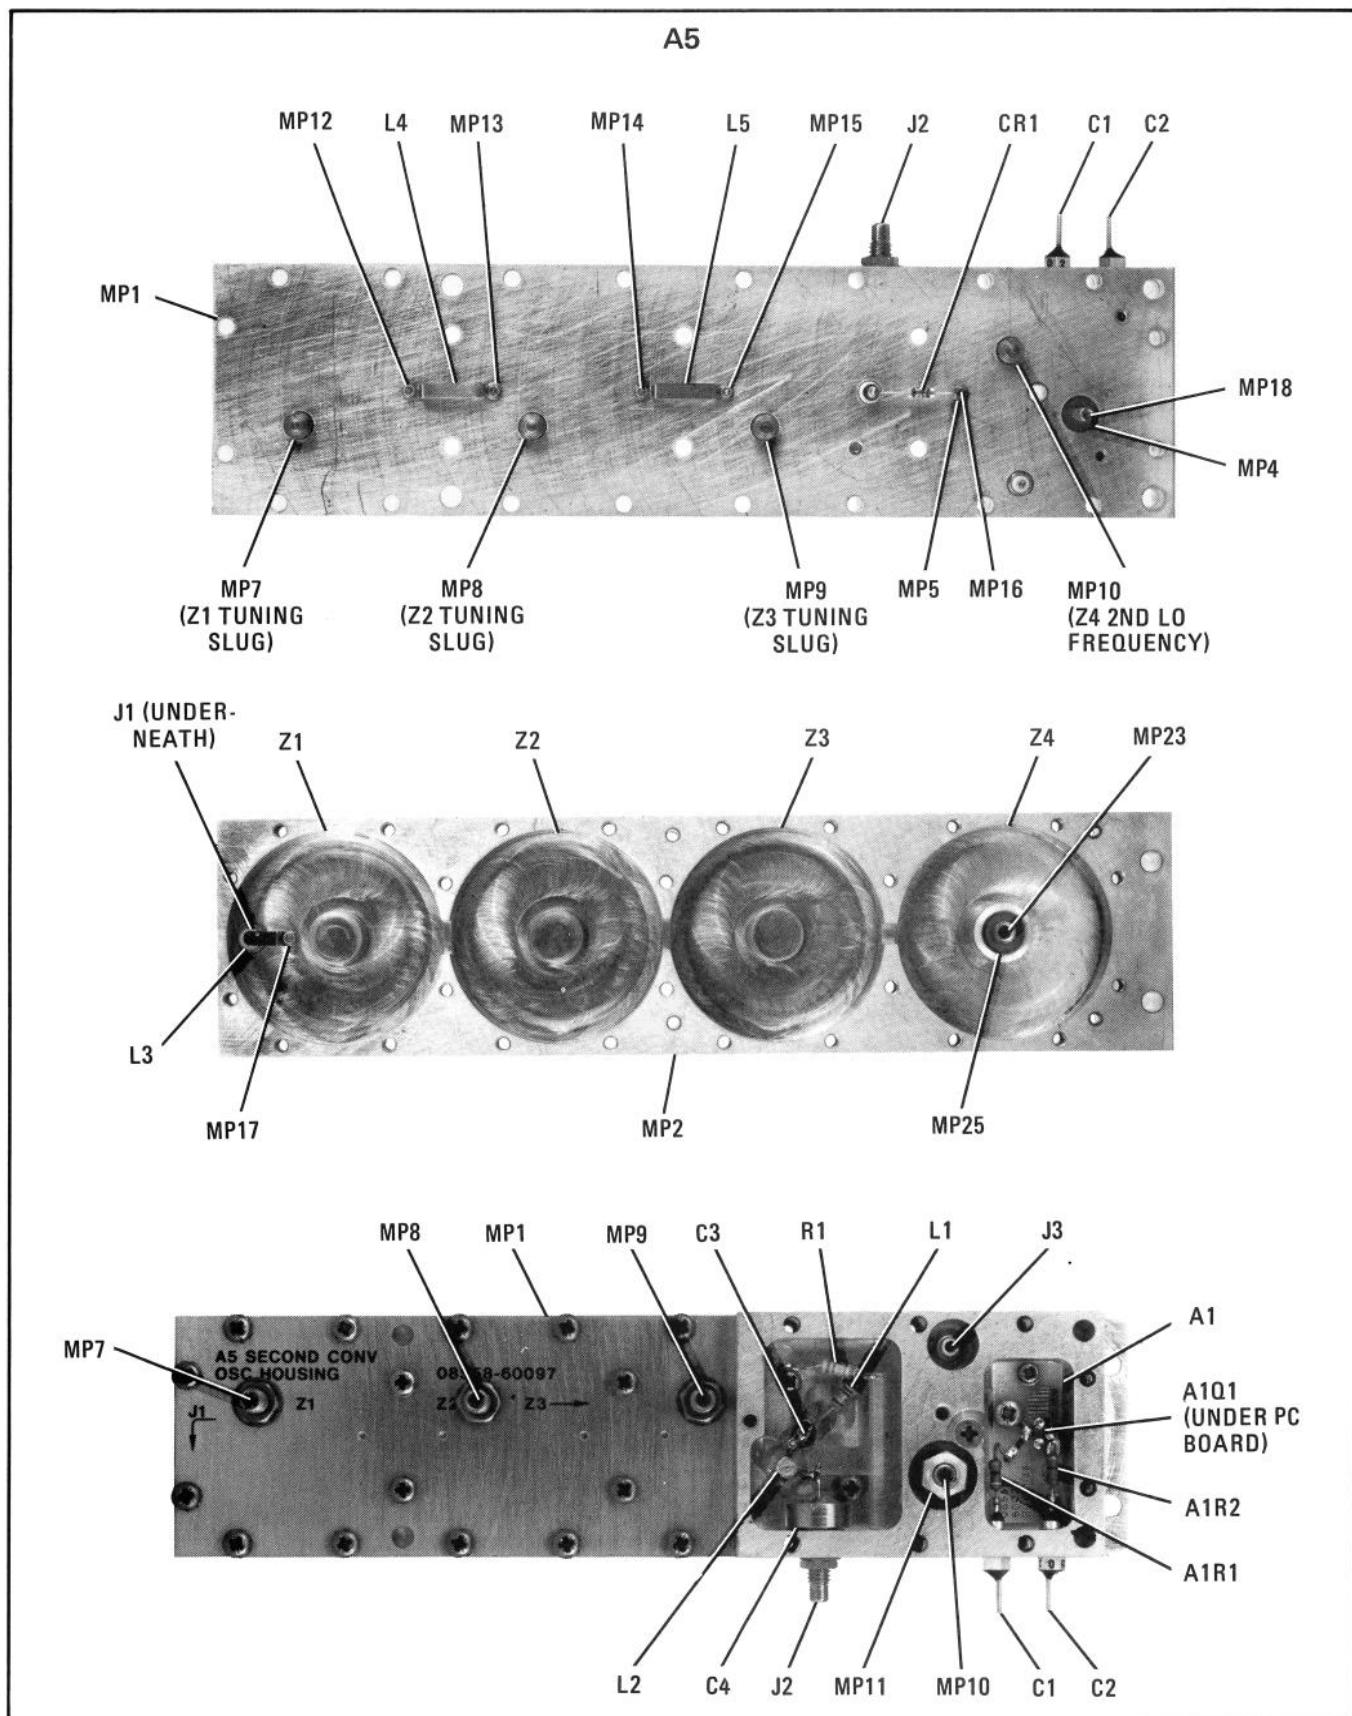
A5 SECOND CONVERTER ASSEMBLY, COMPONENT LOCATIONS
